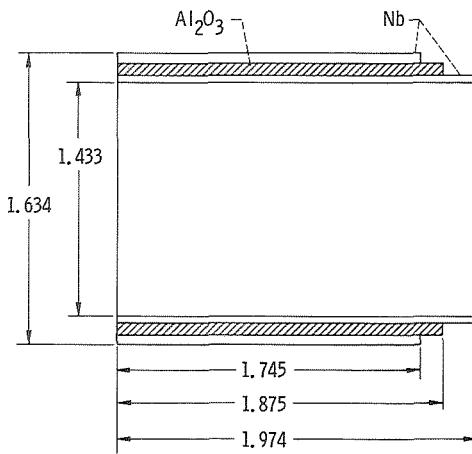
Trilayer test specimen. Niobium layers, 0.38-millimeter thick; alumina layer, 0.25-millimeter thick. Dimensions are in centimeters.
